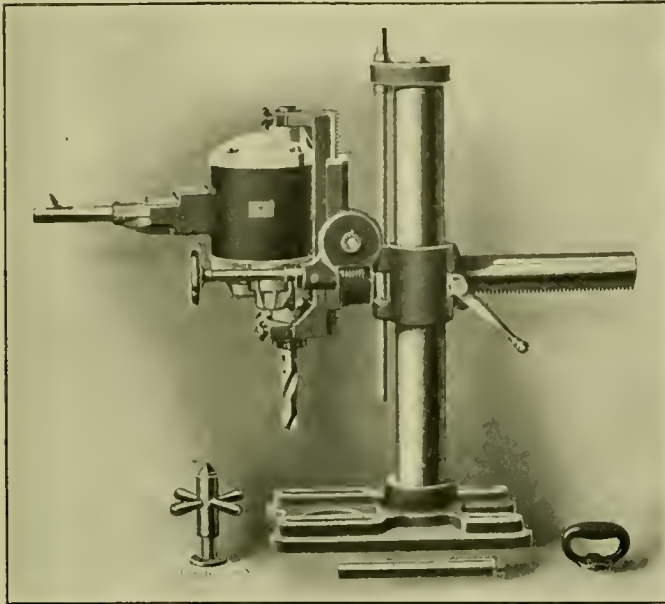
Hisey-Wolf No. 3 Radial Drill Stand
